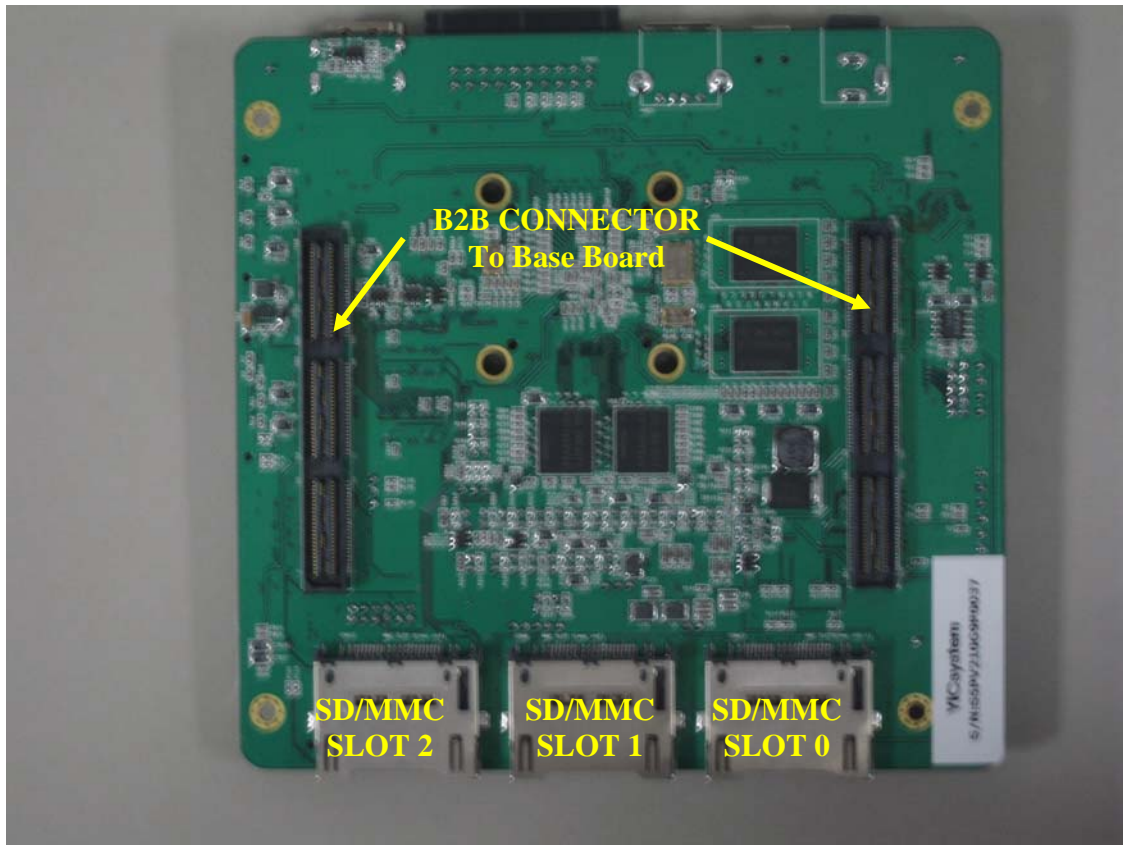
S5PV210 CPU BOARD BOTTOM VIEW
